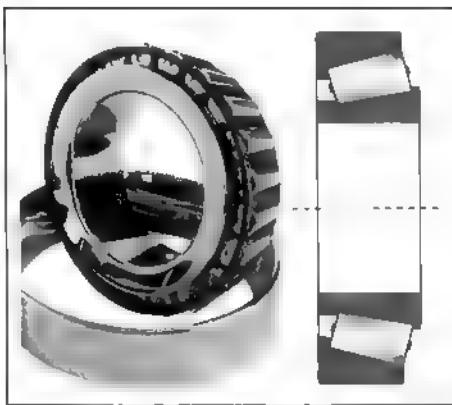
Left, a photo of a tapered roller bearing, photo courtesy the Timken Company, and right, a cross-section through the bearing.
